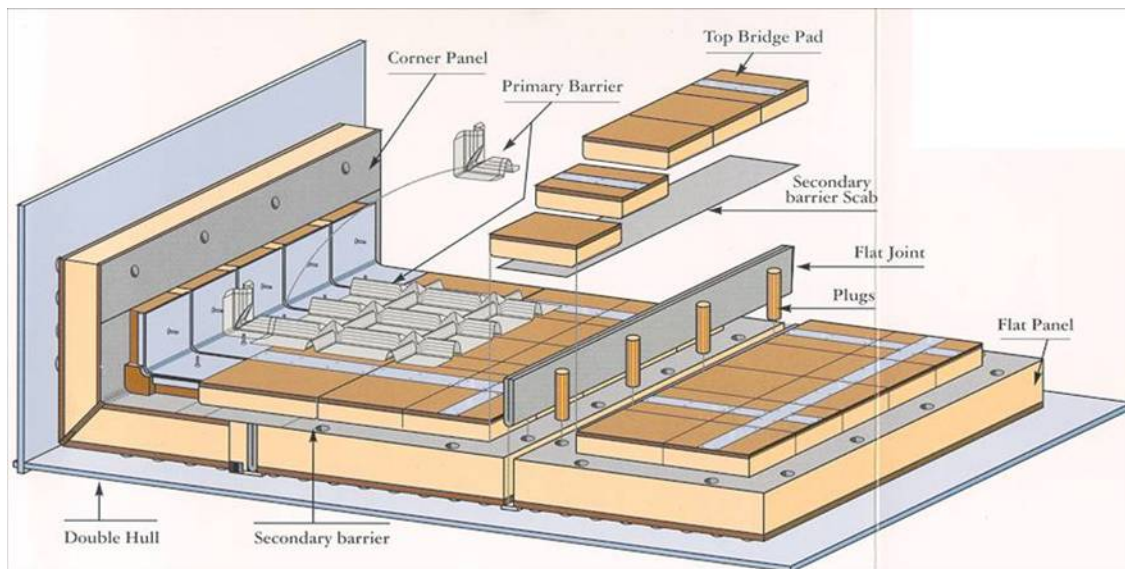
GTT Mark III Construction - Courtesy GTT
